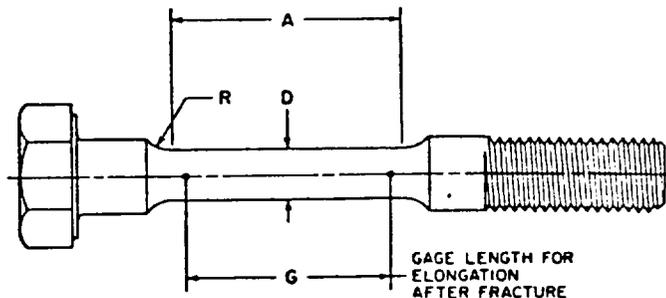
TENSILE TEST SPECIMEN FOR BOLTS OR SCREWS WITH TURNED DOWN SHANK
